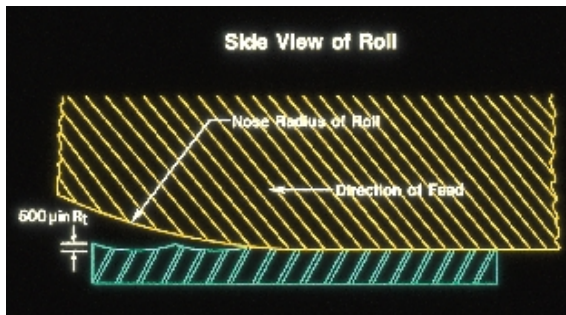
The radius on the burnishing roller presses down on the peaks of a workpiece surface and causes the material to cold-flow, thereby flattening the microscopic peaks into the valleys of the workpiece surface.
